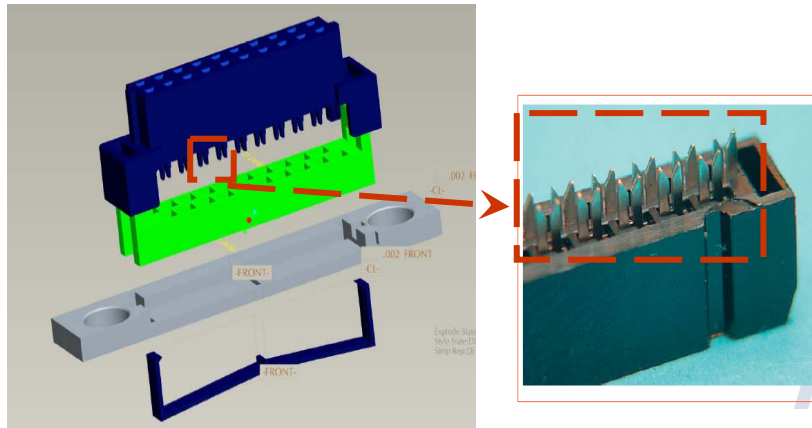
MOLEX IDT connector used for specimen mounting.
